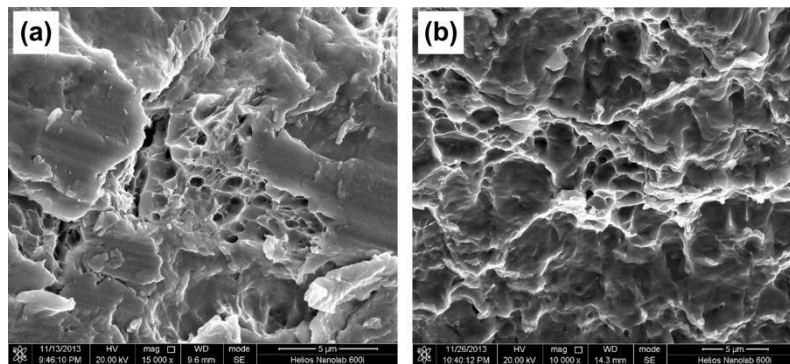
Fatigue fracture morphology of instantaneous fracture regime of: (a) Base metal and (b) Integral welded joint.
